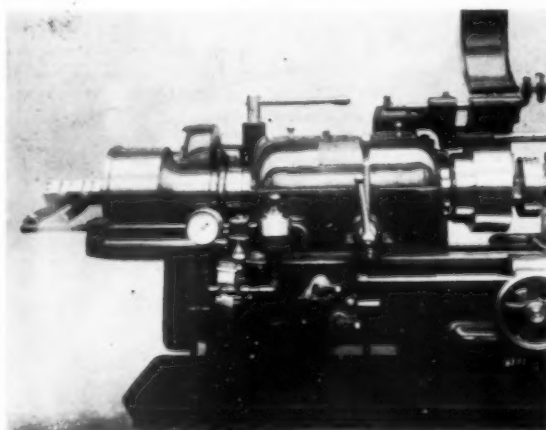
Air-Actuated Chuck provided with Pressure Gauge and Reducing Valve enabling the gripping pressure to be regulated.
